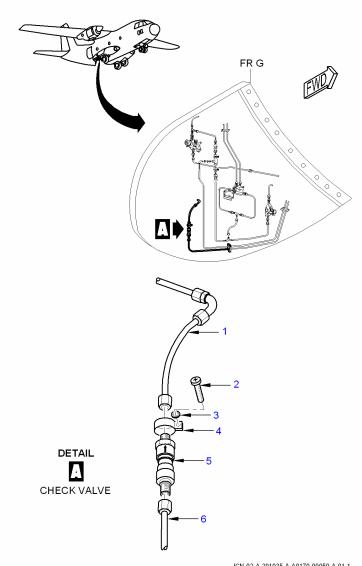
Check Valve in RH Main Landing Gear Fairing
